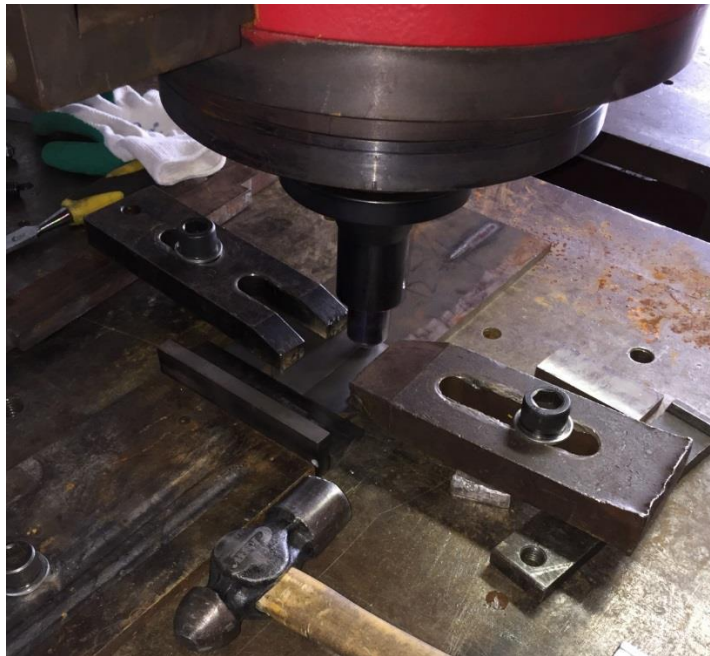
Fixturing of NiTi sheets prior to the start of welding.
